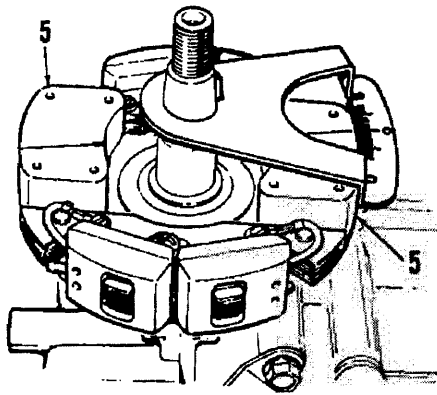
Stator assembly is timed using special tool. Refer to text for proper timing procedure.
